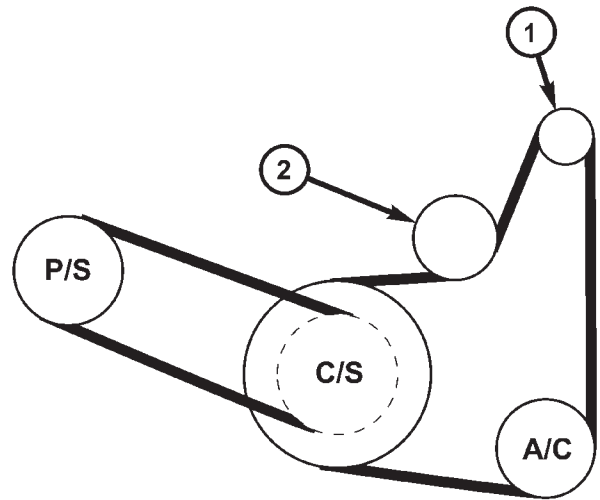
Accessory Drive Belt System - 2.0L/2.4L
